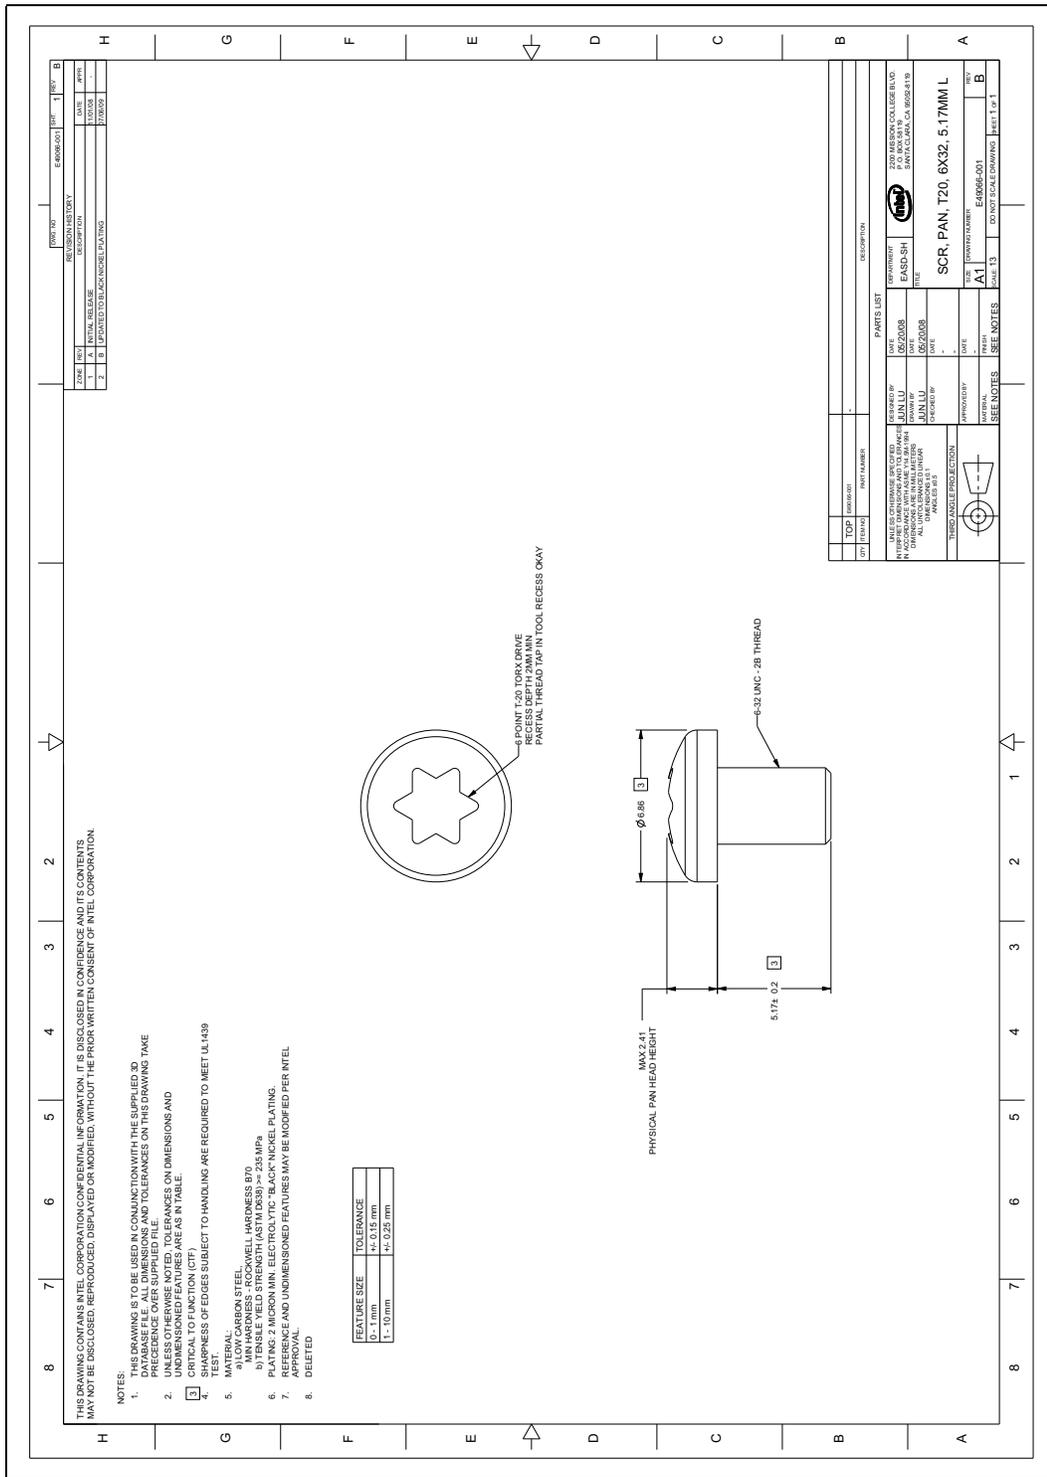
1U ILM Standard 6-32 Thread Fastener
